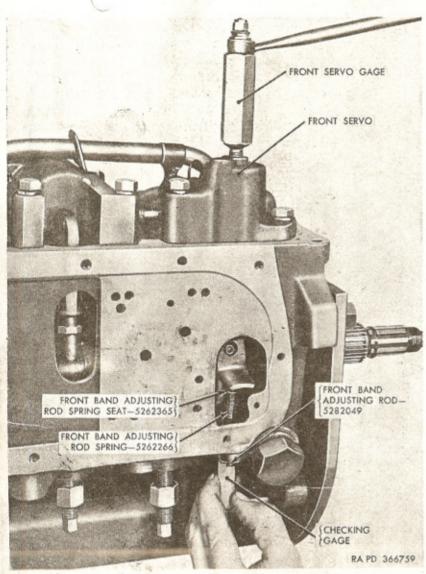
Use of adjusting rod checking yage—A7950250 and front servo adjusting gage—8708127.
